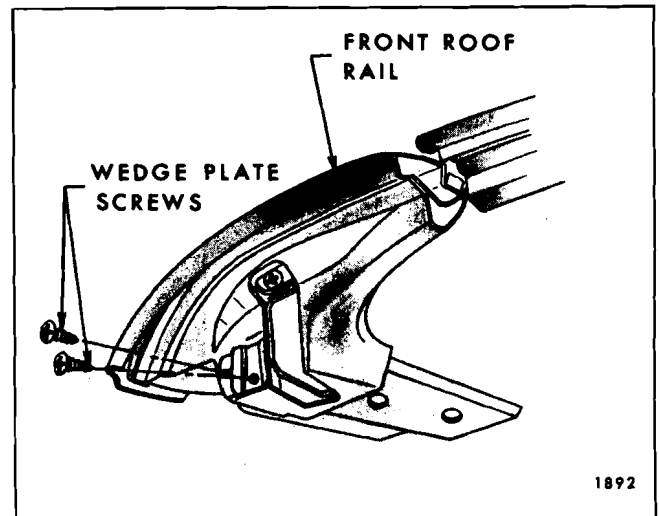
Front Roof Rail Wedge Plate - "Z" Styles
